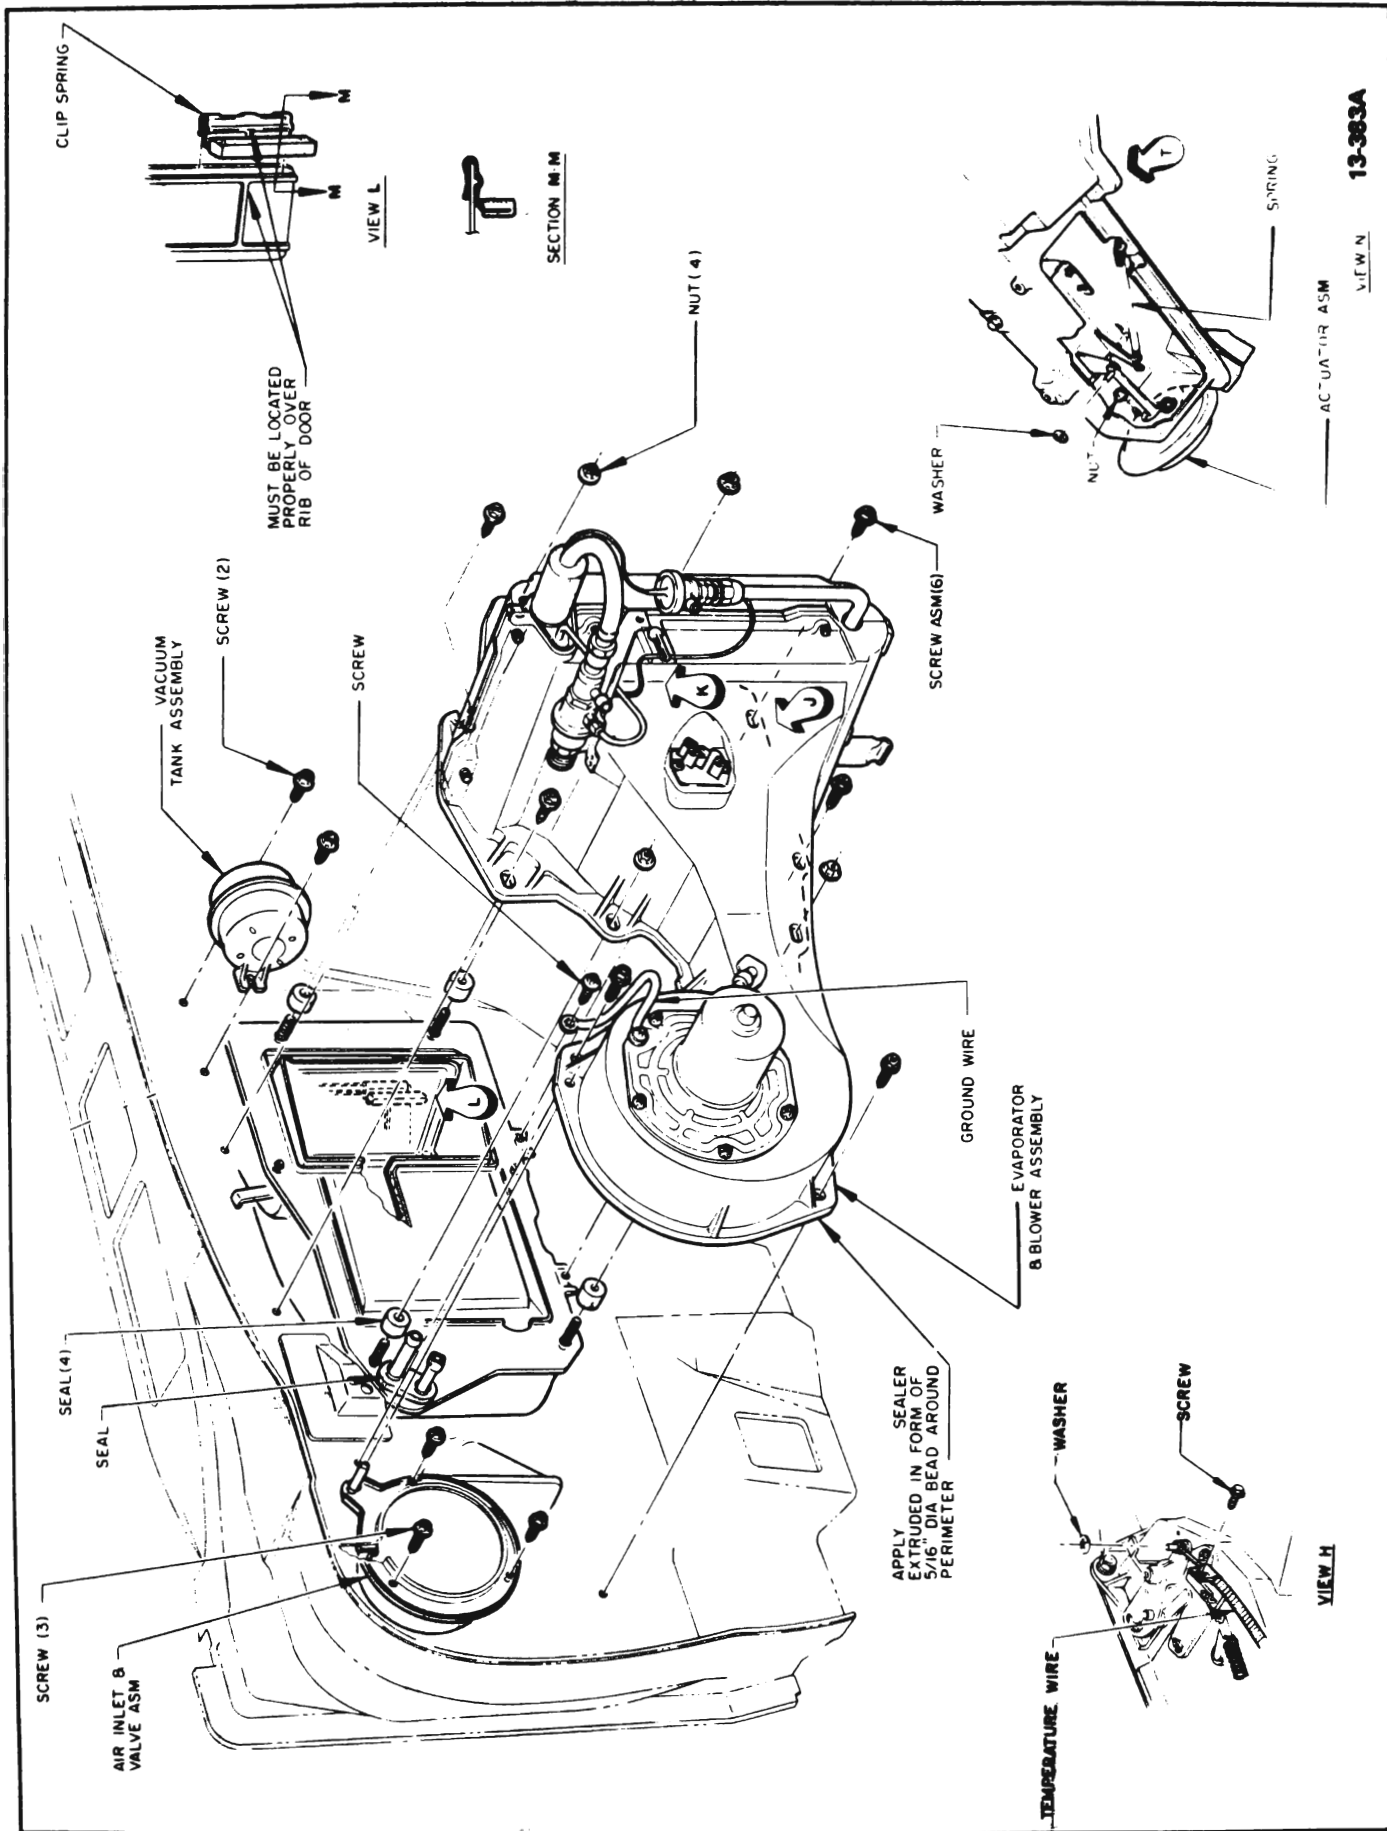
Air Conditioner Heater Assembly, 43-44000 Series
